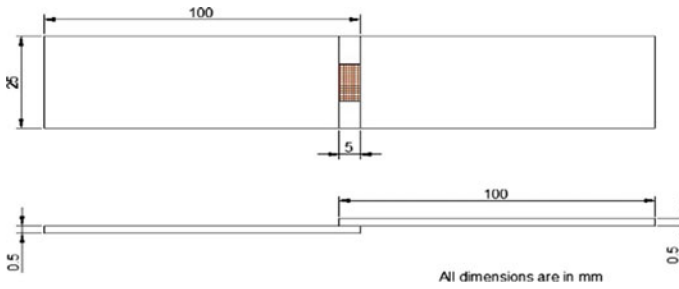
Schematic of weld specimen highlighting the area of weldment
